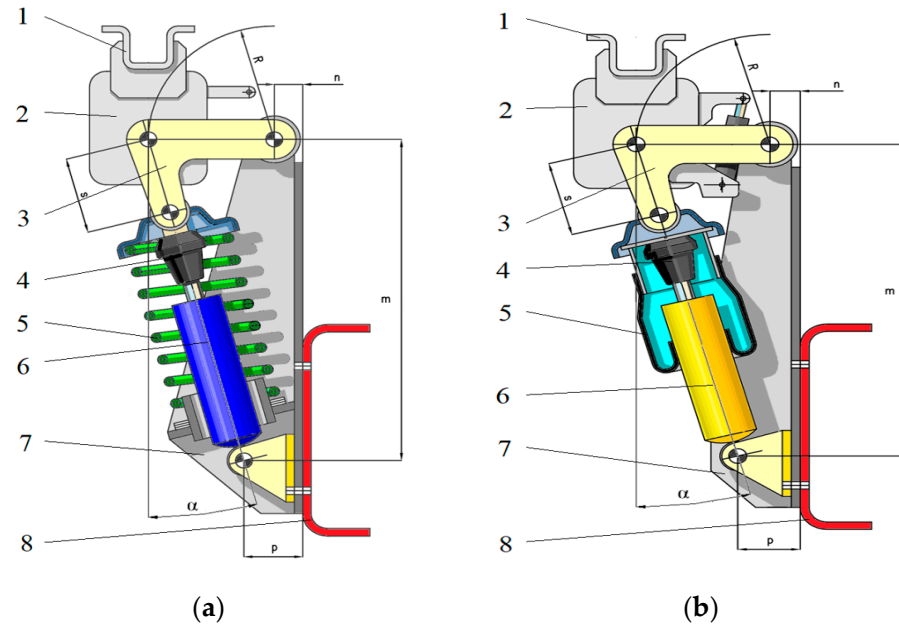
Schematic representation of the helical spring suspension (a) and the pneumatic suspension (b). 1—cabin frame rail; 2—locking mechanisms; 3—lever; 4—buffer; 5a—coil spring; 5b—air chamber; 6—damper; 7—suspension bracket; 8—chassis frame rail; R—lever radius; m , n , p —coordinates of the fixed joints; and α —inclination angle of the assembly.
